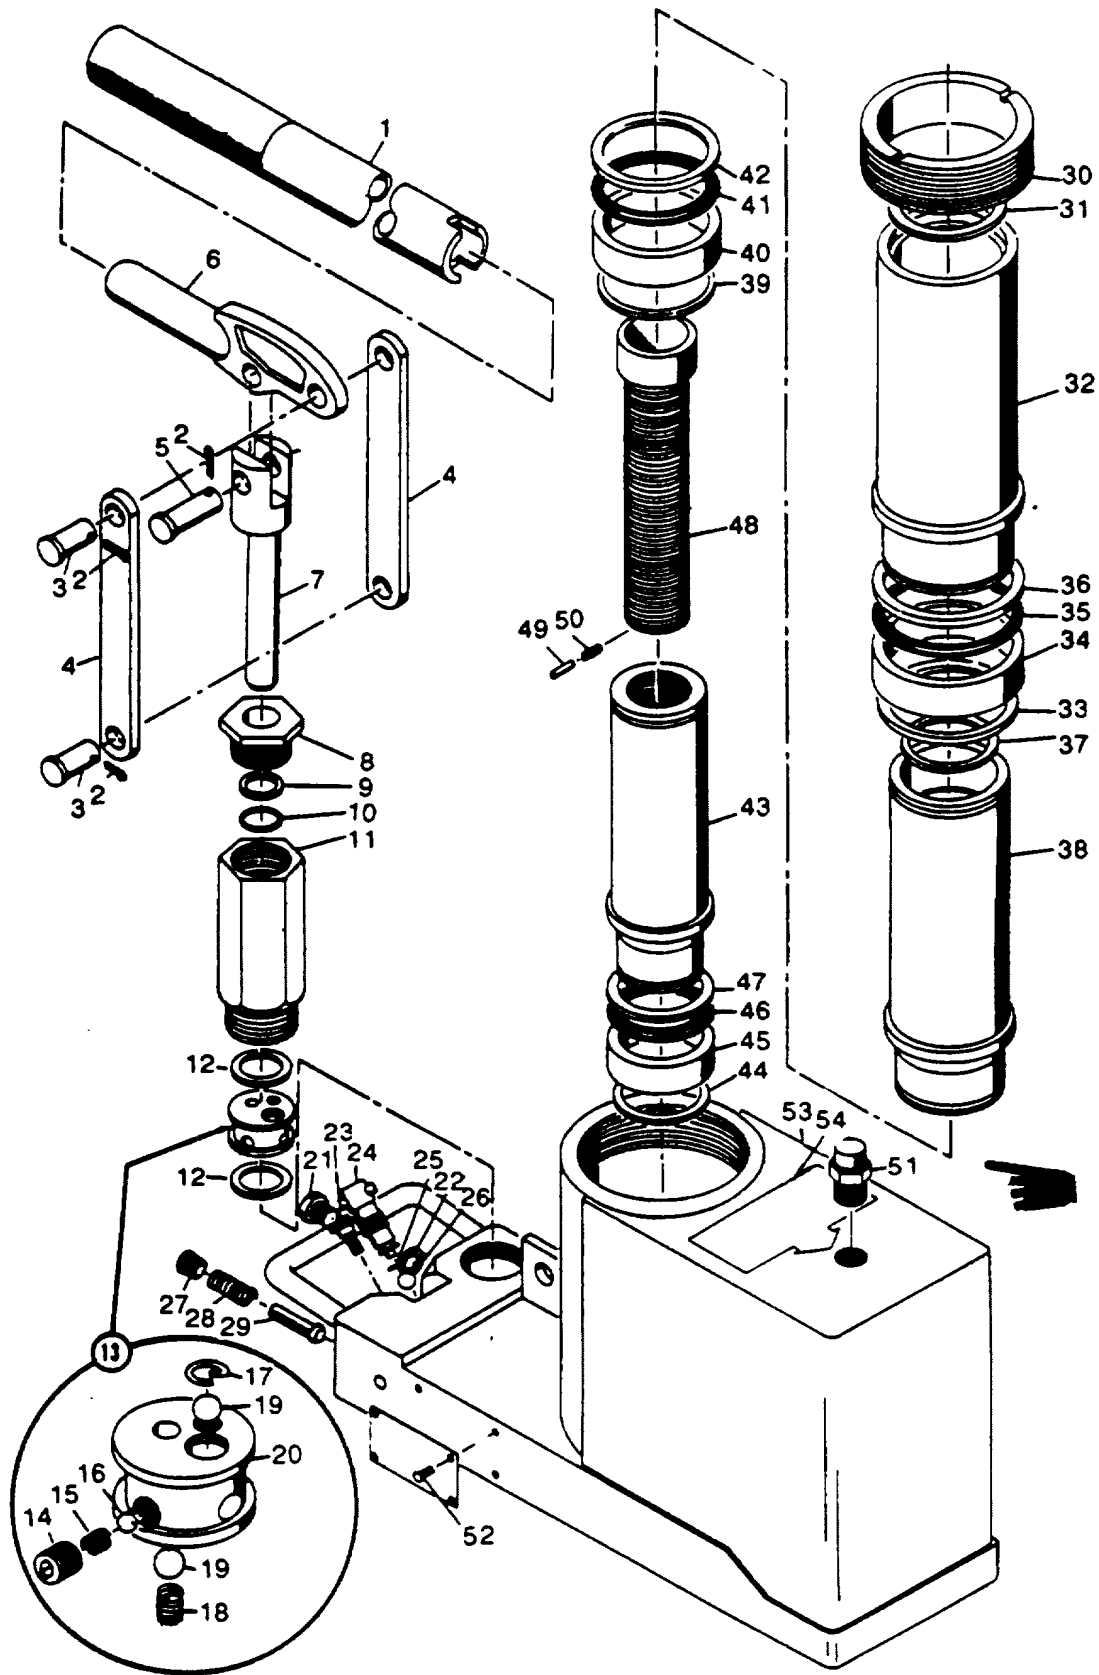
10-Ton Hydraulic Aircraft Hand Jack.
